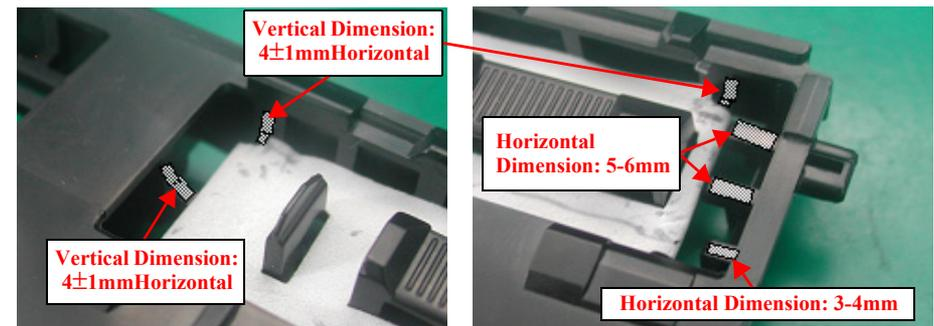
Gluing point of the Porous Pad, Paper Guide, Front
